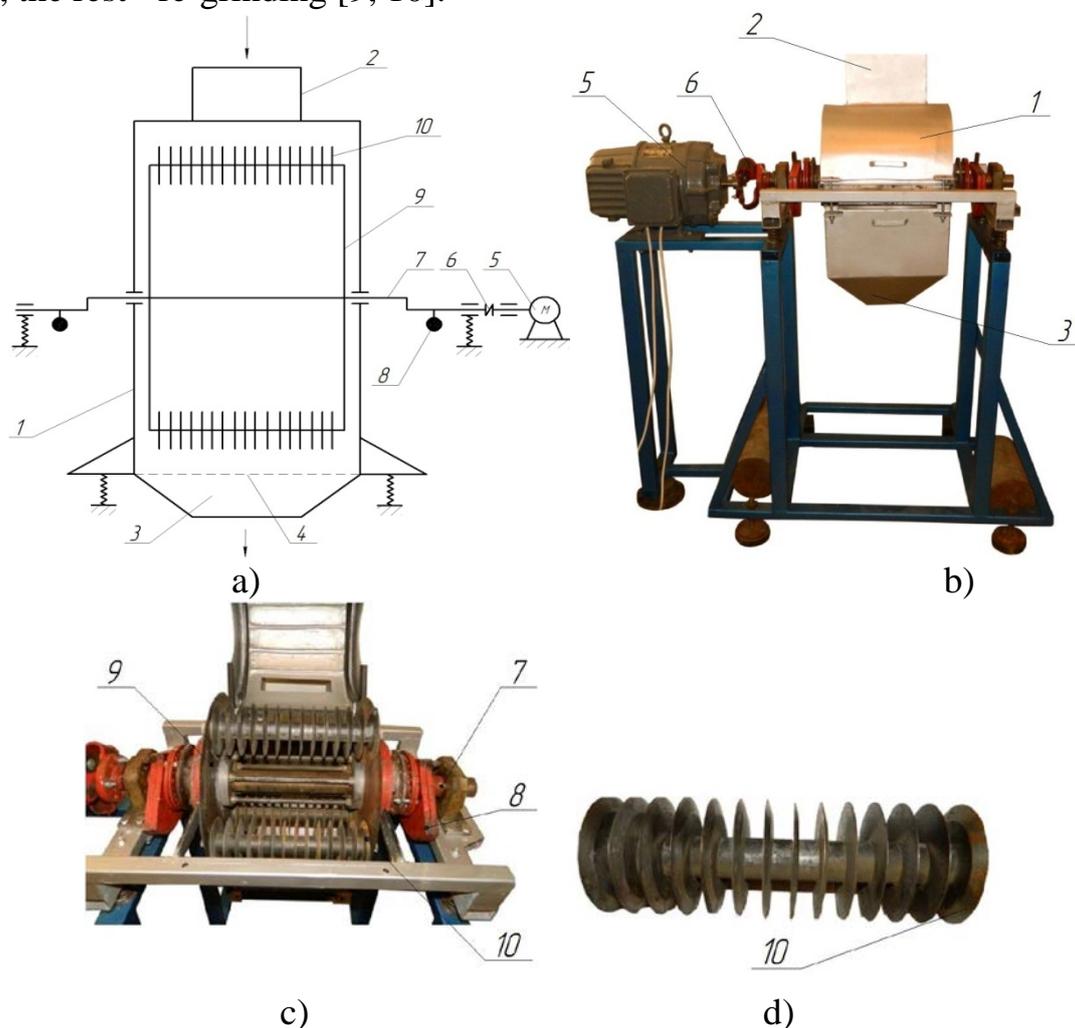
Vibration-disk crusher: a) - the basic scheme; b) - general view; c) - the executive body; d) - Disc beat; 1 - the case; 2, 3 - boot loading and neck; 4 - sieve; 5 - electric motor; 6 - elastic sleeve; 7 - kinematic shaft; 8 - counterweight; 9 - rotor; 10 - discoid beat.
